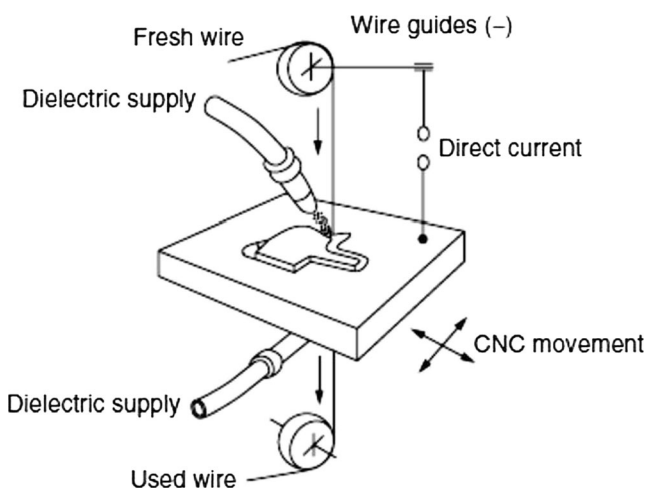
Wire electric discharge machining (WEDM) schematic diagram
